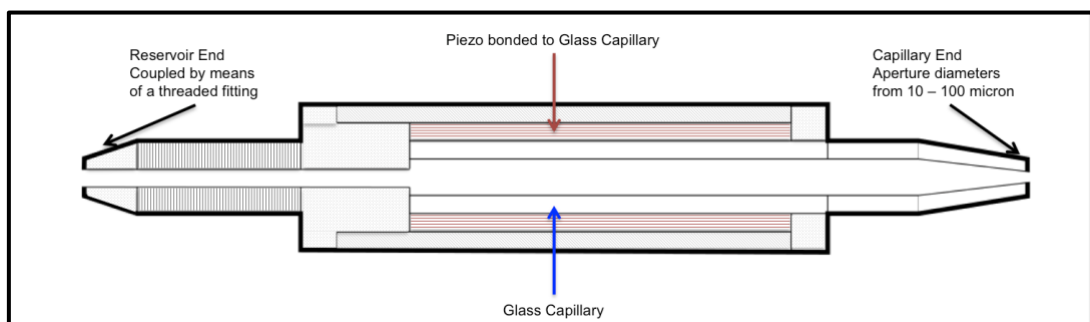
Cross section of the MJ-AT-01 Print head (MicroFab Inc. U.S.A.). Overall Dimensions: Length 26 mm, Diameter 4 mm
